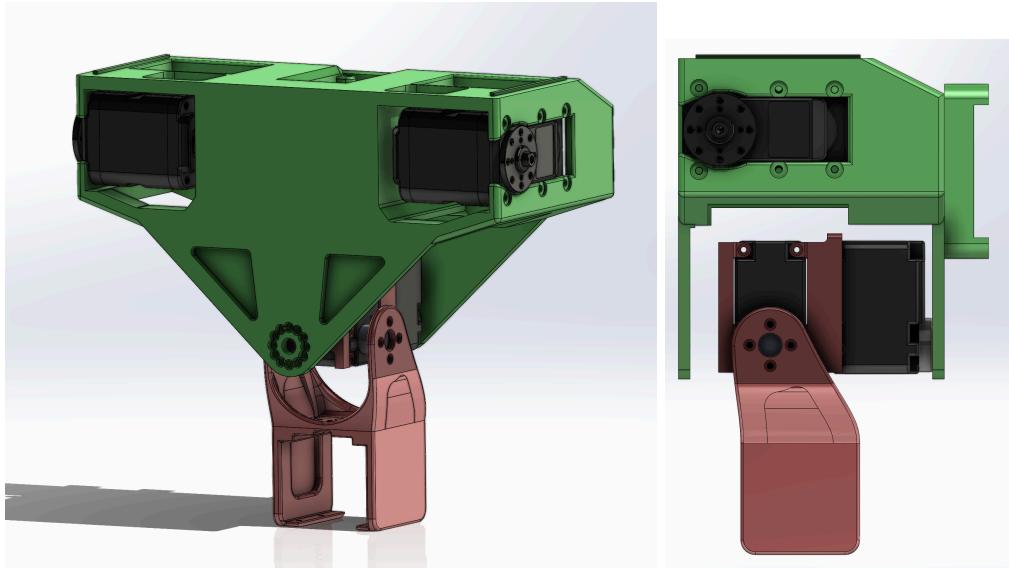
Model of old robot chest chassis design in isometric view (Left) and side view (Right)
